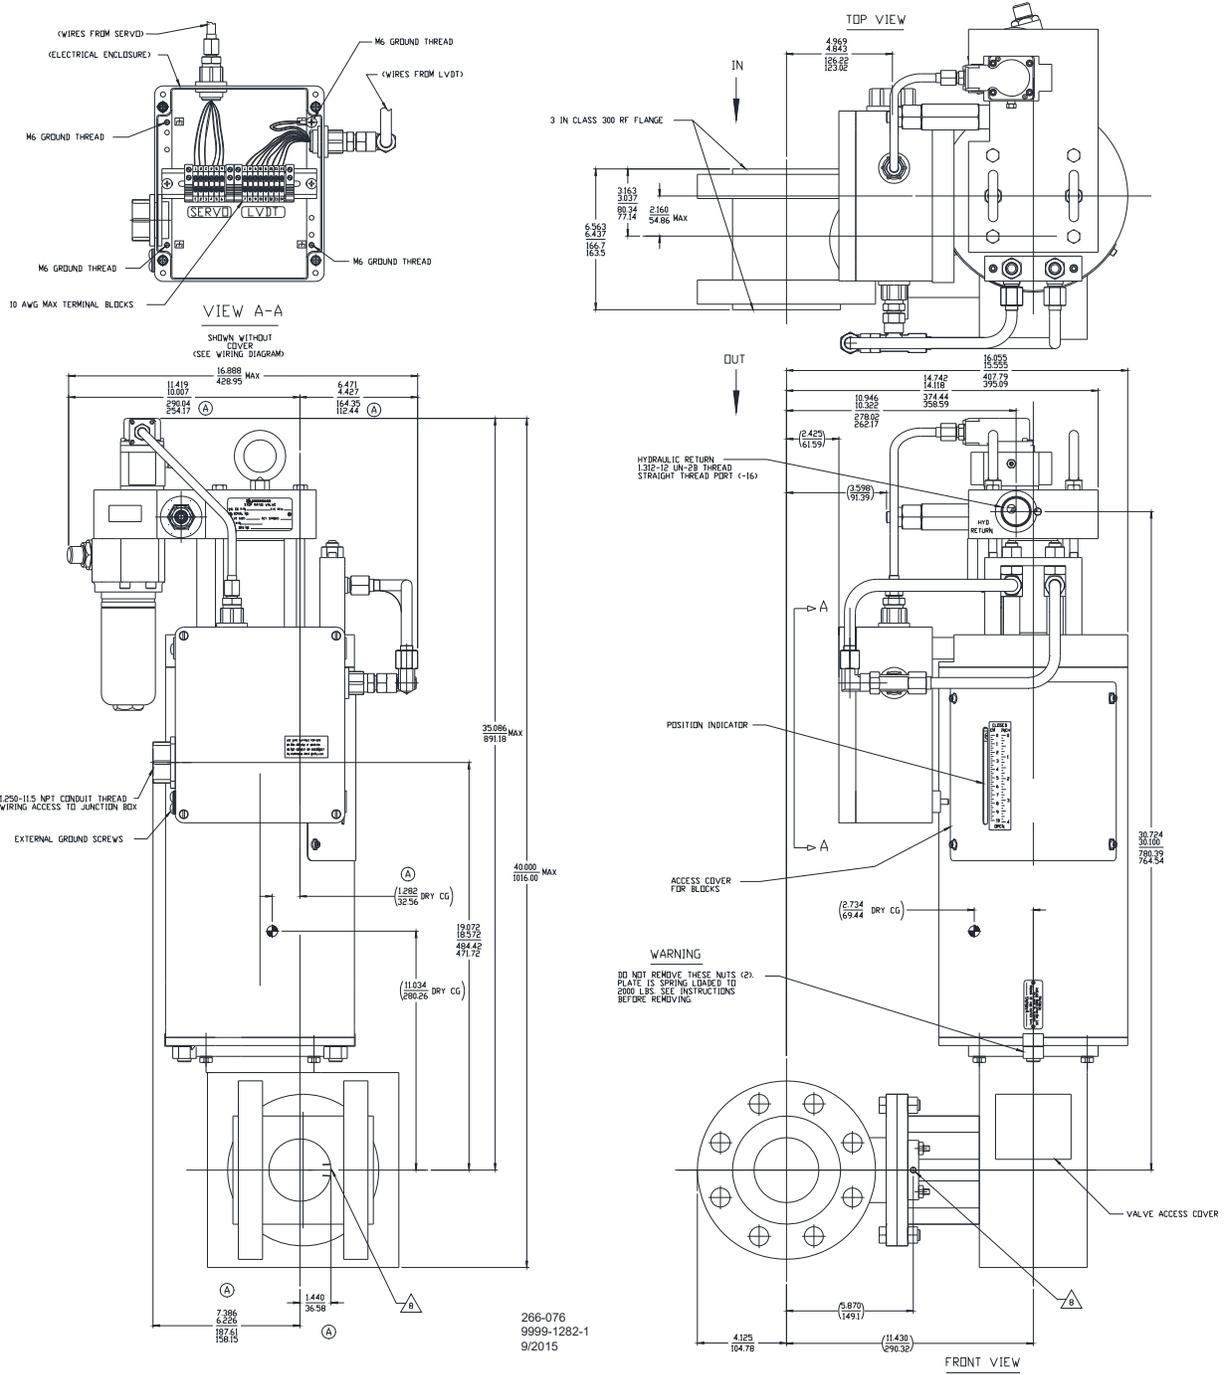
Gas Stop/Ratio Valve Outline Drawing (3-inch High Pressure Trip (HPT))
